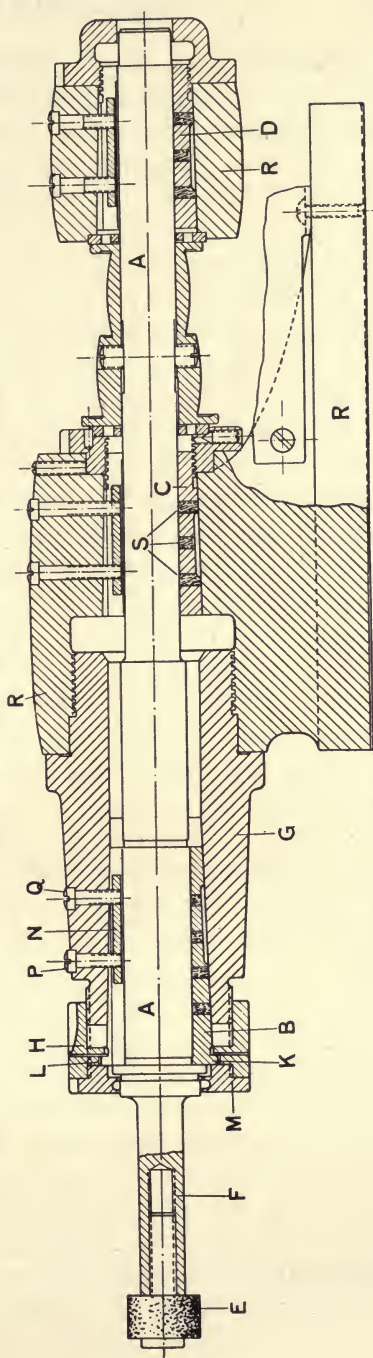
HEALD INTERNAL GRINDING SPINDLE
